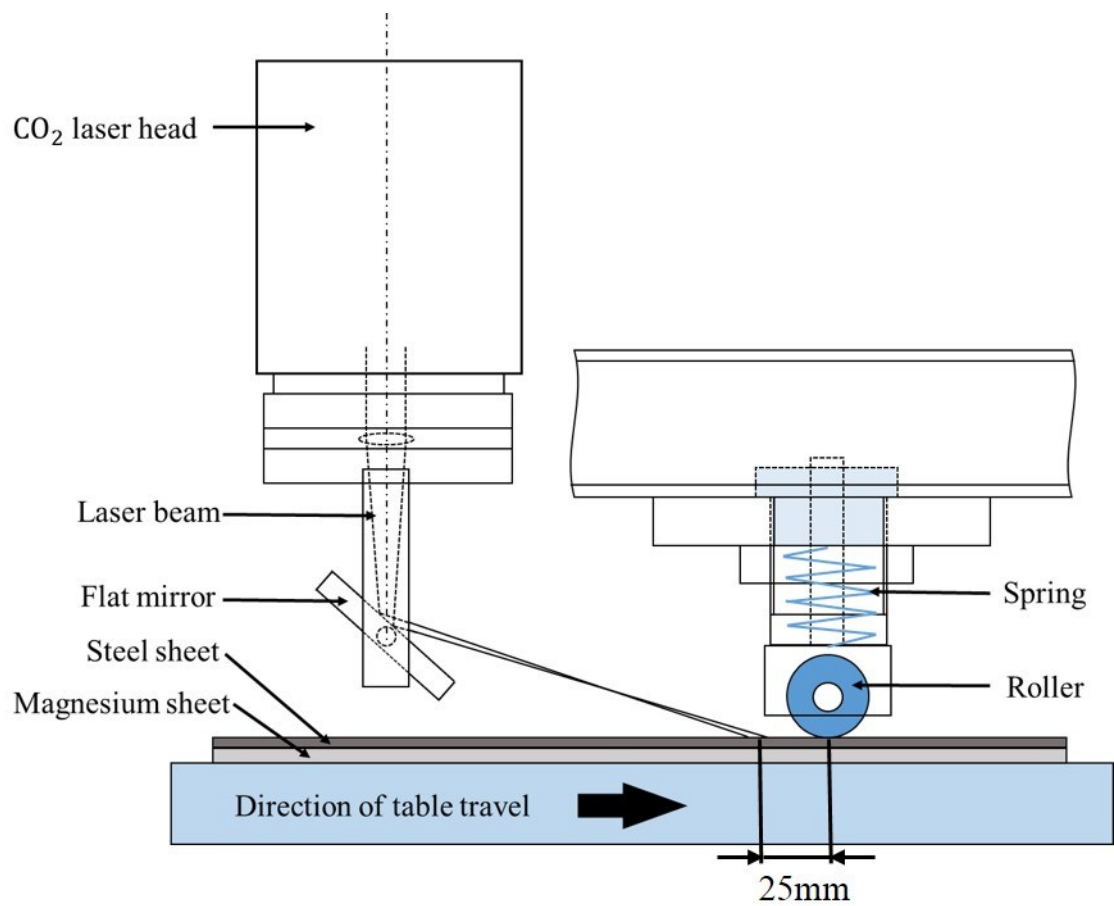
Schematic diagram of laser roll welding equipment
